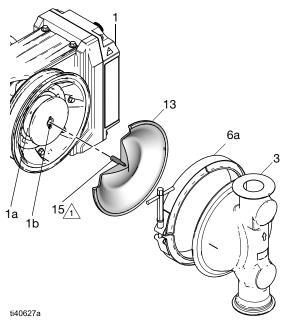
Reassemble Overmolded Diaphragms (Hygienic Model Shown)
